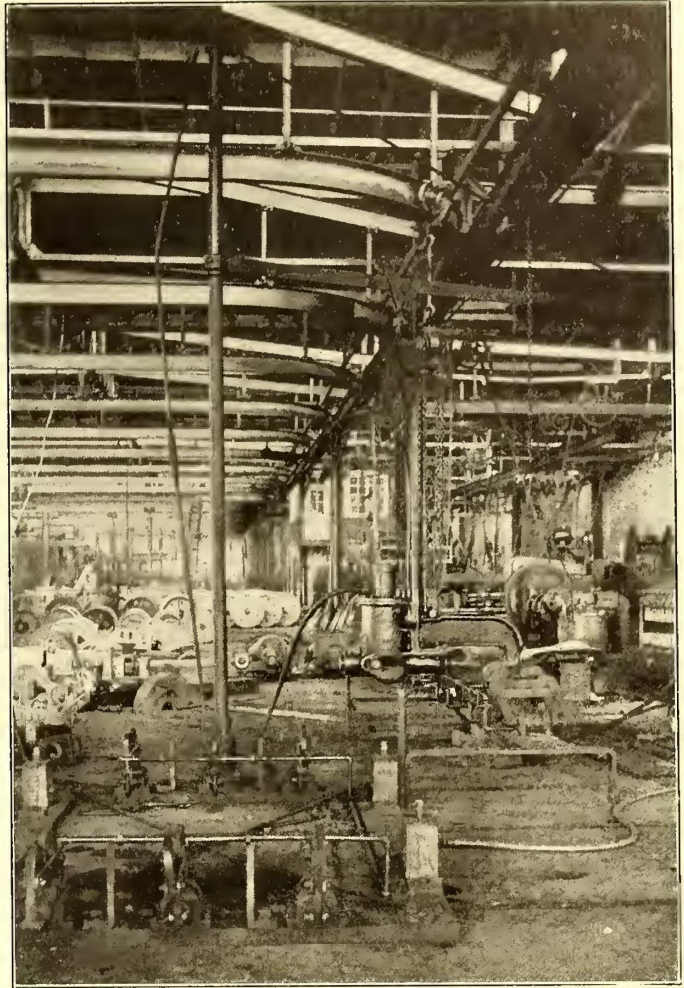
TRAVELER SYSTEM, PNEUMATIC RIVETER AND ASSEMBLER
